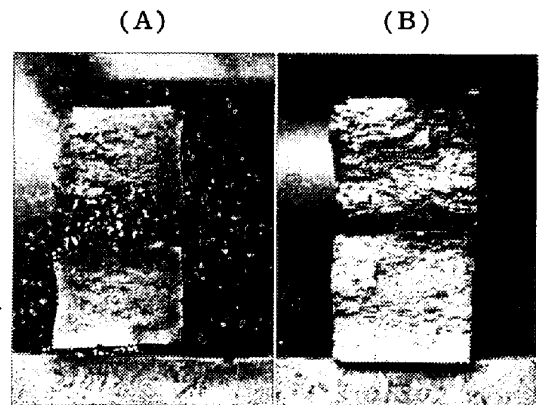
Comparison of tension test fractures for each bendability. (A).....Bend good material. (B).....Bend broken material.
